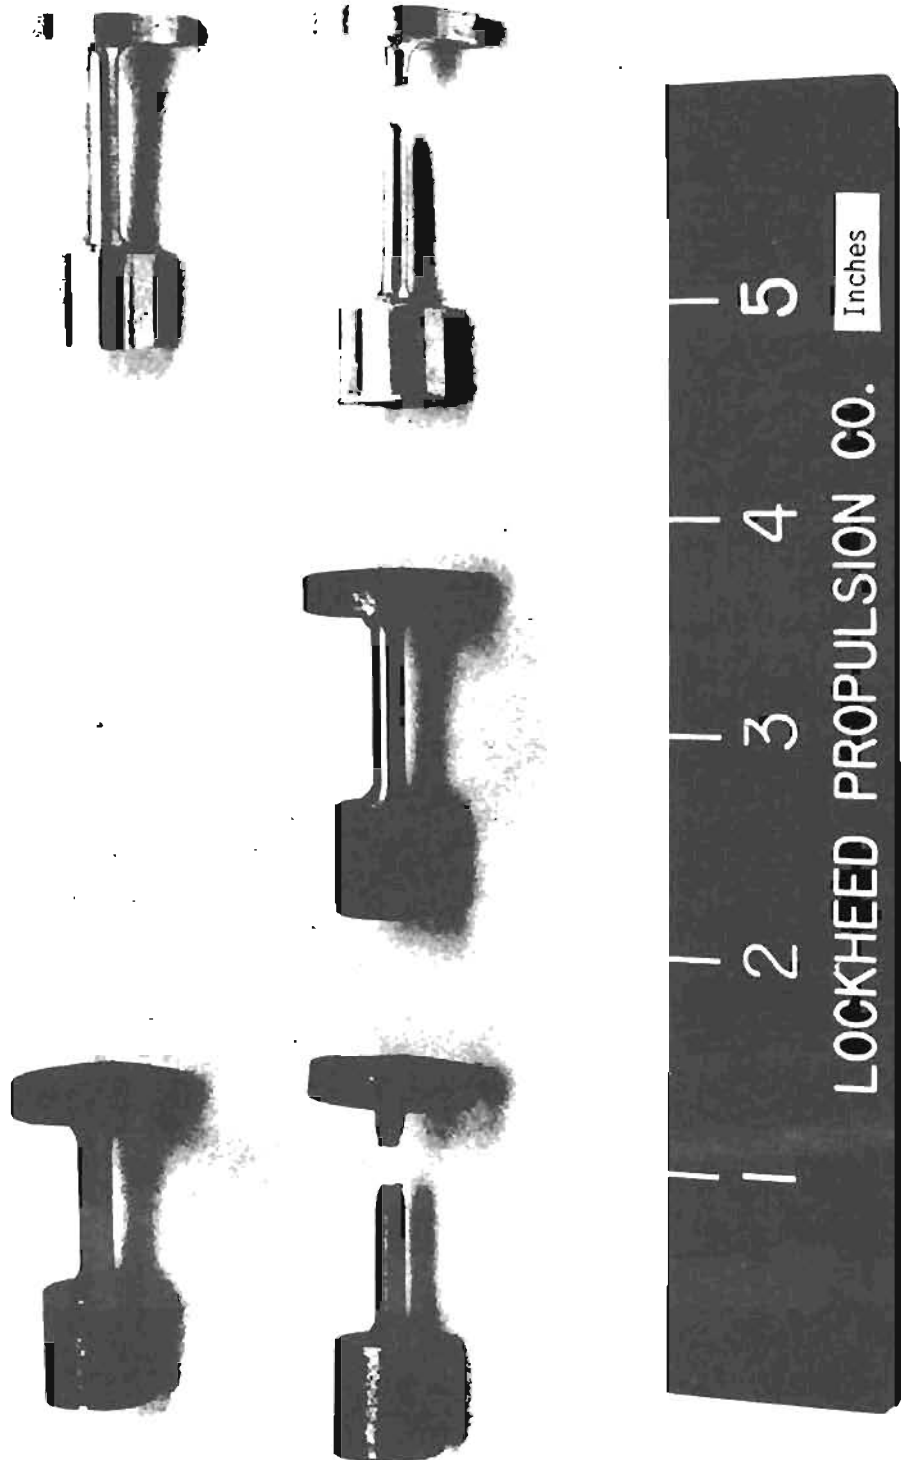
Gun Launch Tested Steel and Aluminum Samples
